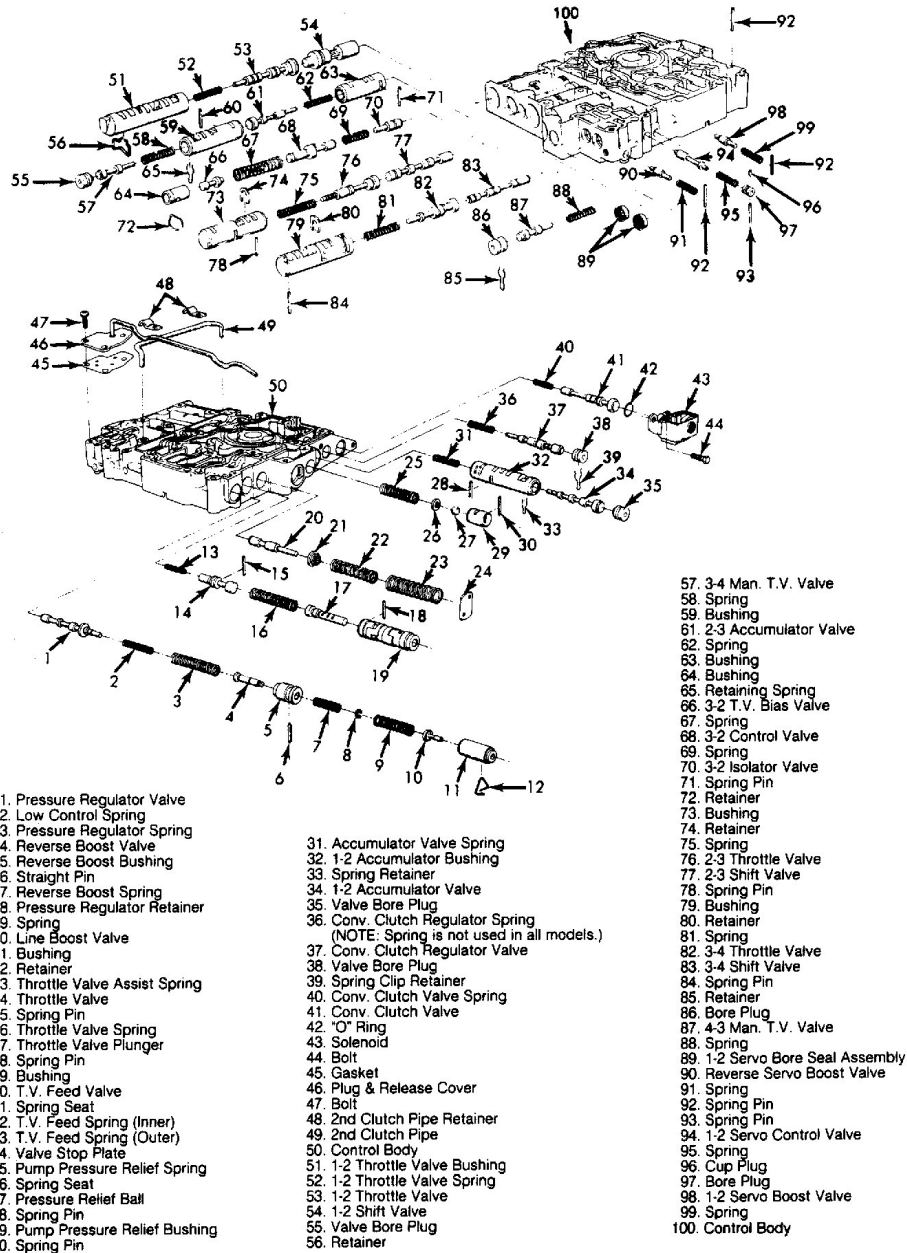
Exploded View of Hydra-Matic 4T60 Valve Body Assembly
